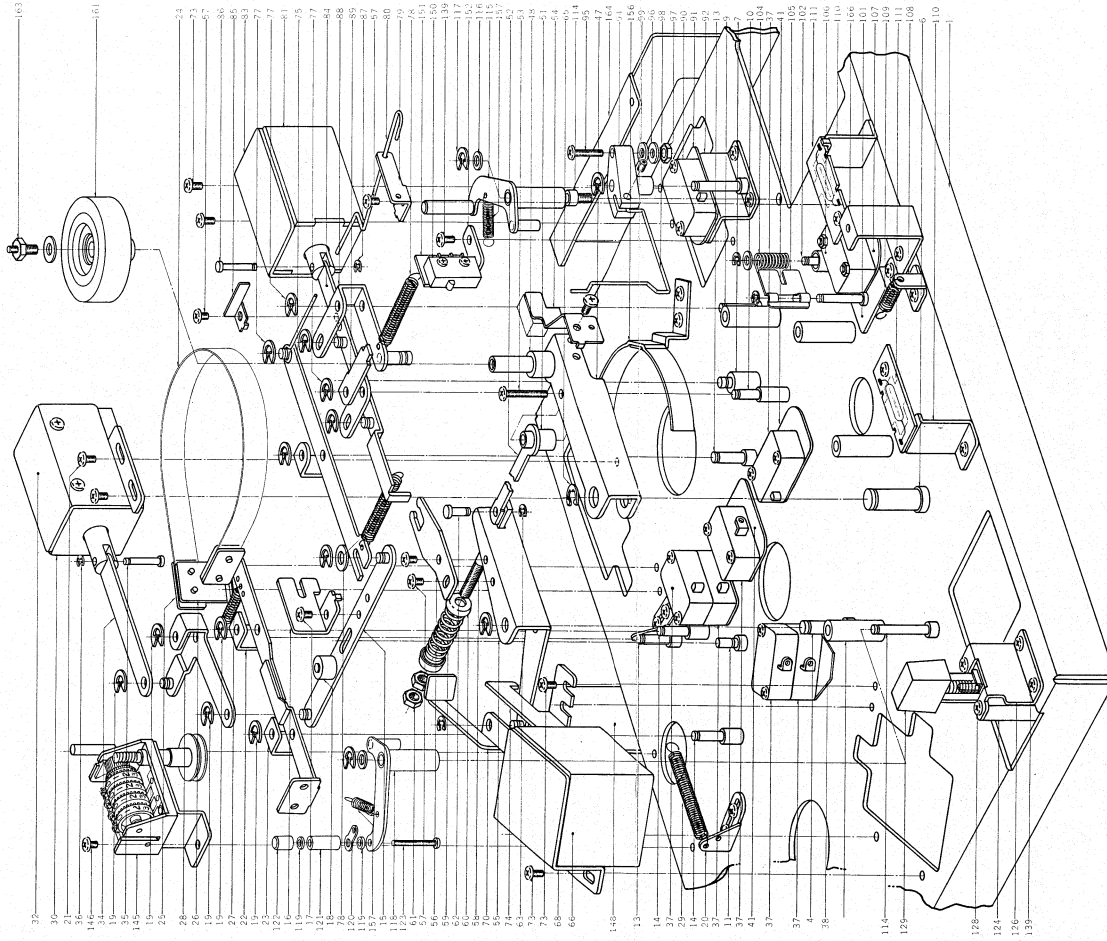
ILLUSTRATION OF MECHANISM ASSEMBLY BLOCK
